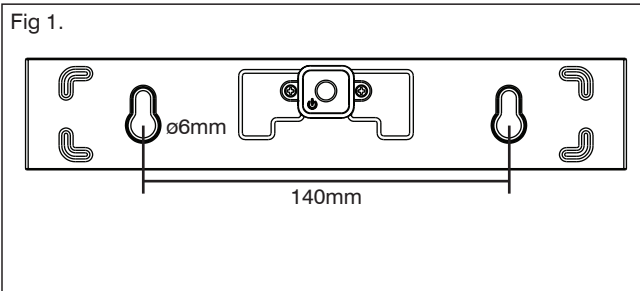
Drill 2 holes  $\varnothing 6\text{mm}$ , 50mm depth 140mm apart
